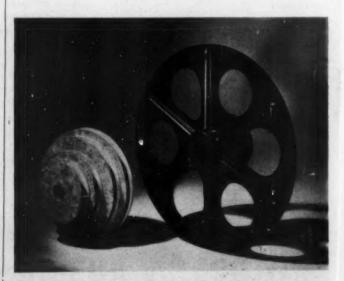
Parts produced by molded-macerated method. Holes in both parts were molded; keyway in V-belt pulley was broached; its grooves were machined
